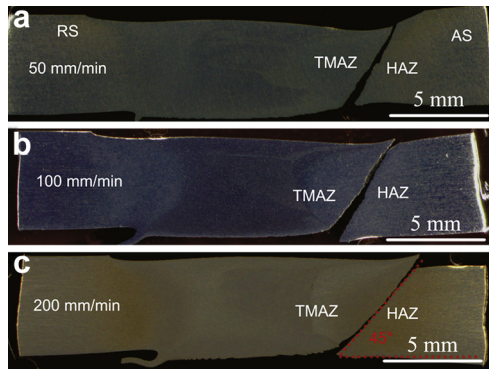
Fracture features of the joints welded at different welding speeds: (a) 50 mm/min, (b) 100 mm/min, (c) 200 mm/min.
